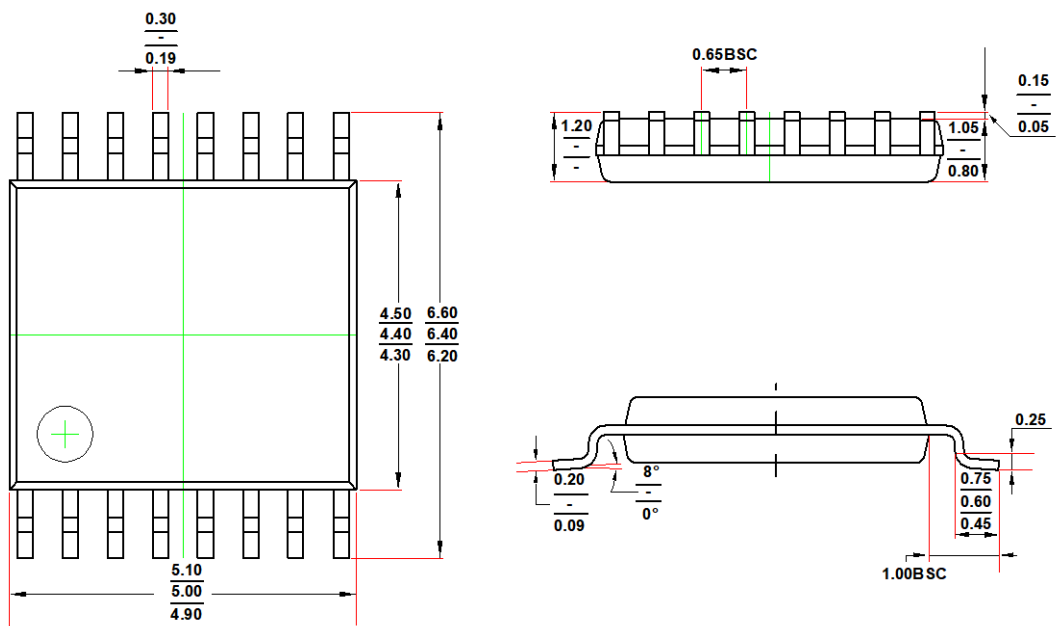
16-Lead TSSOP Package Dimensions Shown in Millimeters
